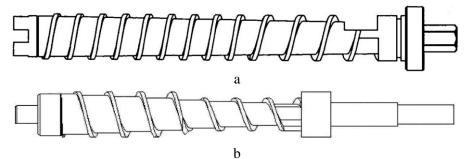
Improved screw core in its feed section: a – Patent No. CN204340262U; b – Patent No. CN202826482U
